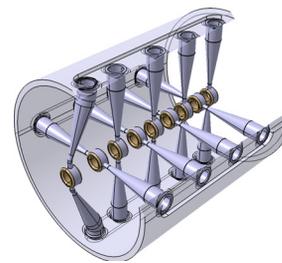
Model of the CCH1 dummy segment for welding and galvanic testing purposes.
